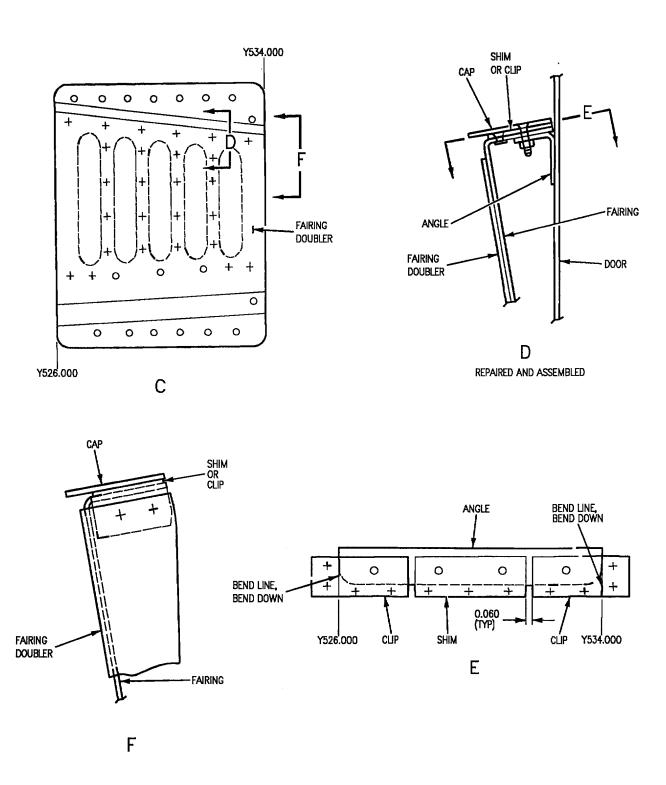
Door 116 Fairing Repair, Wing Trailing Edge to Fuselage (Sheet 2)
